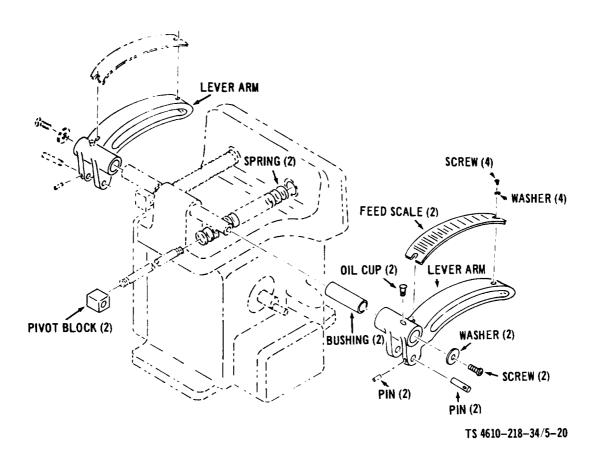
Chemical Solution Feeder Lever Arms and Push Rode, Disassembly and Reassembly
